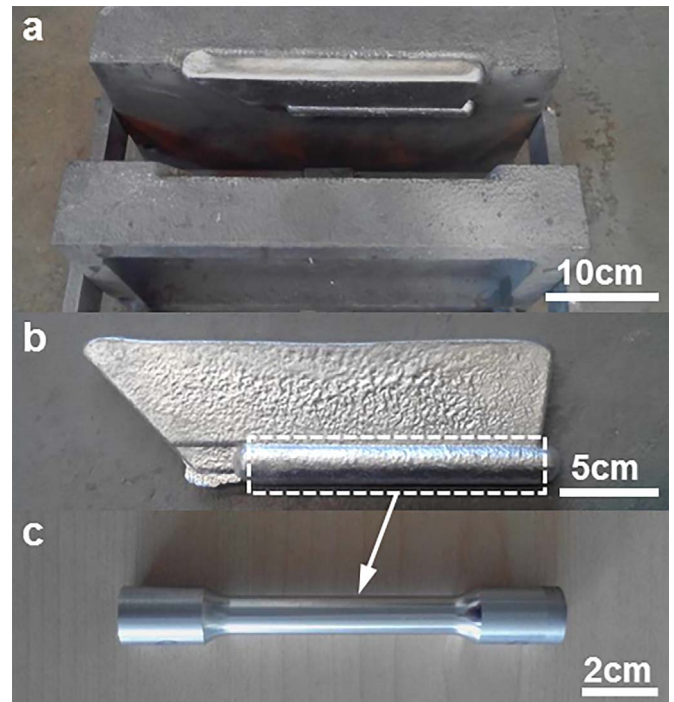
(a) Keel block permanent casting mould, (b) gravity casting made by the mould and (c) machined tensile test bar from the casting.
